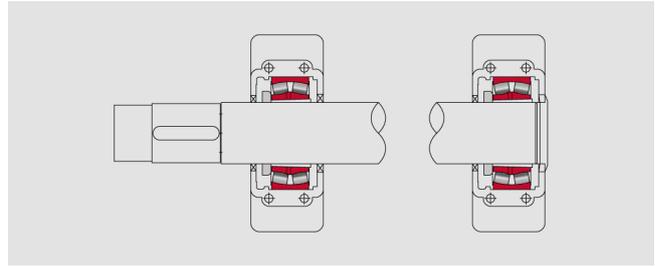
In the fixed plummer block, to prevent axial displacement of the bearing, 2 locating rings are installed, one on either side of the bearing. Locating rings are manufactured in aluminium.
